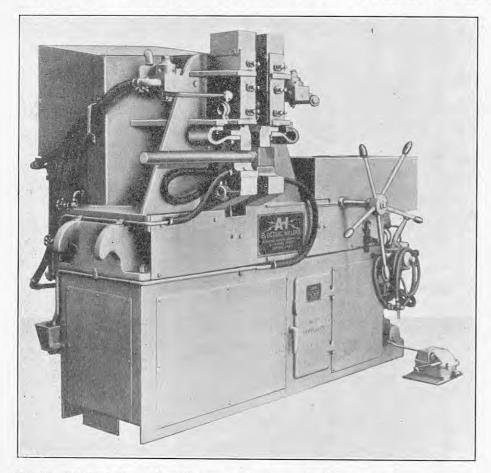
250-KVA Flash Butt-Welding Machine; A.I. Electric Welding Machines,
